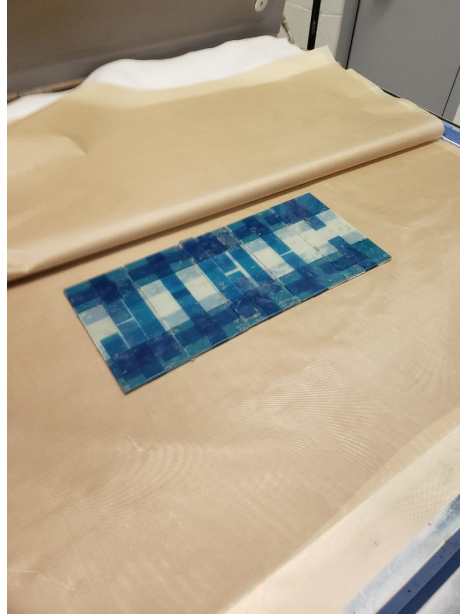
Tabbed sections from all five panel sets prior to cure in a vacuum table at 180°F for 90 minutes. Three $1''\times 8''$ specimens were cut out of these sections for tensile testing.
